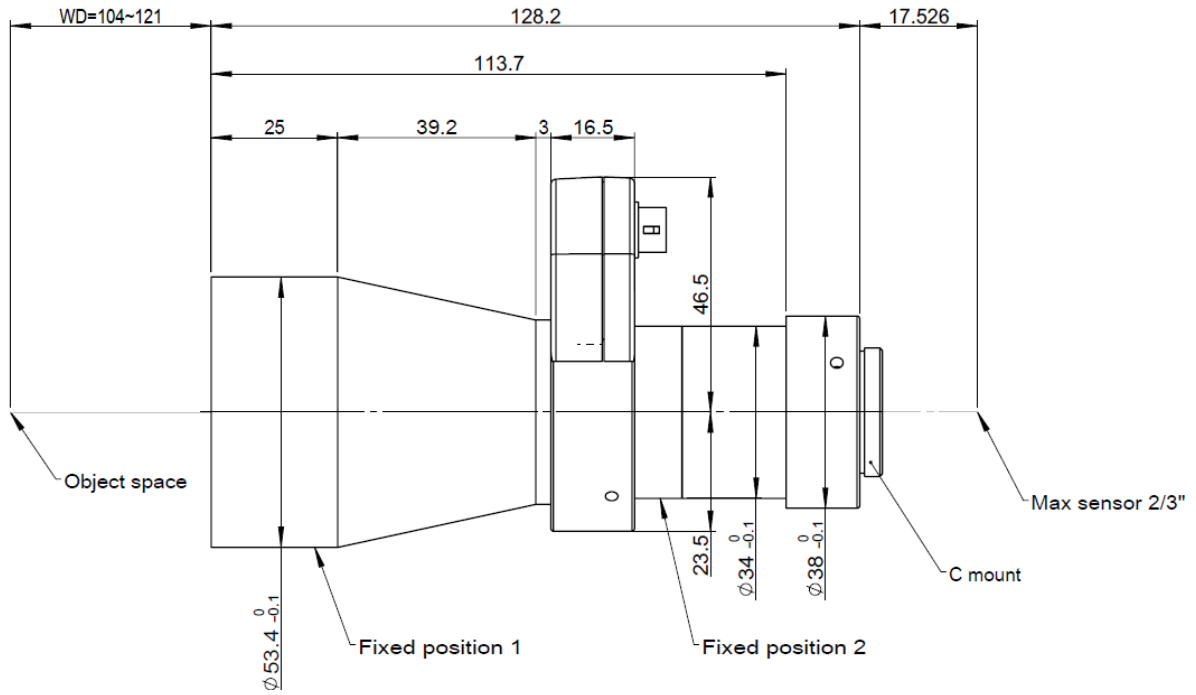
Mechanical drawing of the DTLP-23-036-115 (unit: mm).
